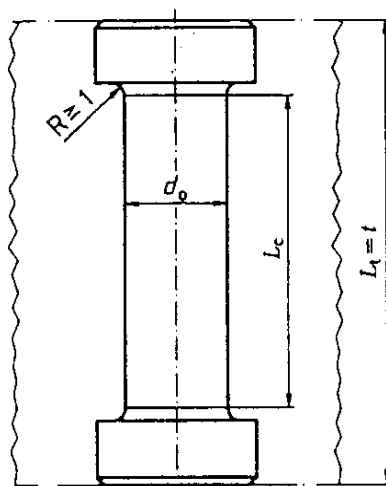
Type and preparation of test pieces without extension pieces, where $20 \text{ mm} < t \leq 100 \text{ mm}$
